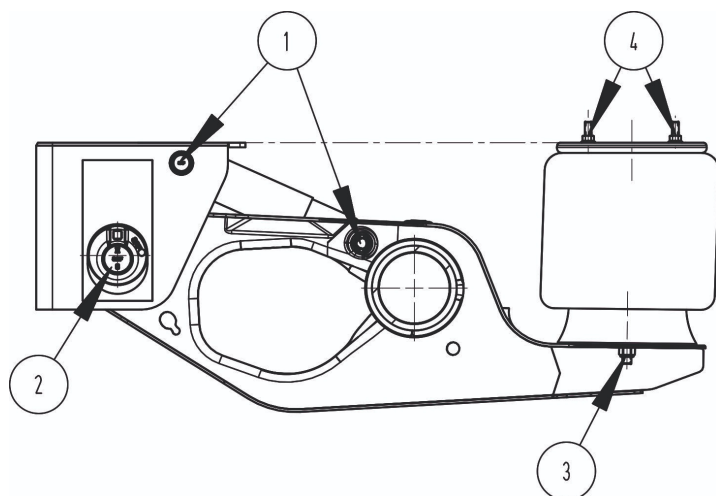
Torques SAF INTRA Aluminium / stainless steel hanger bracket
